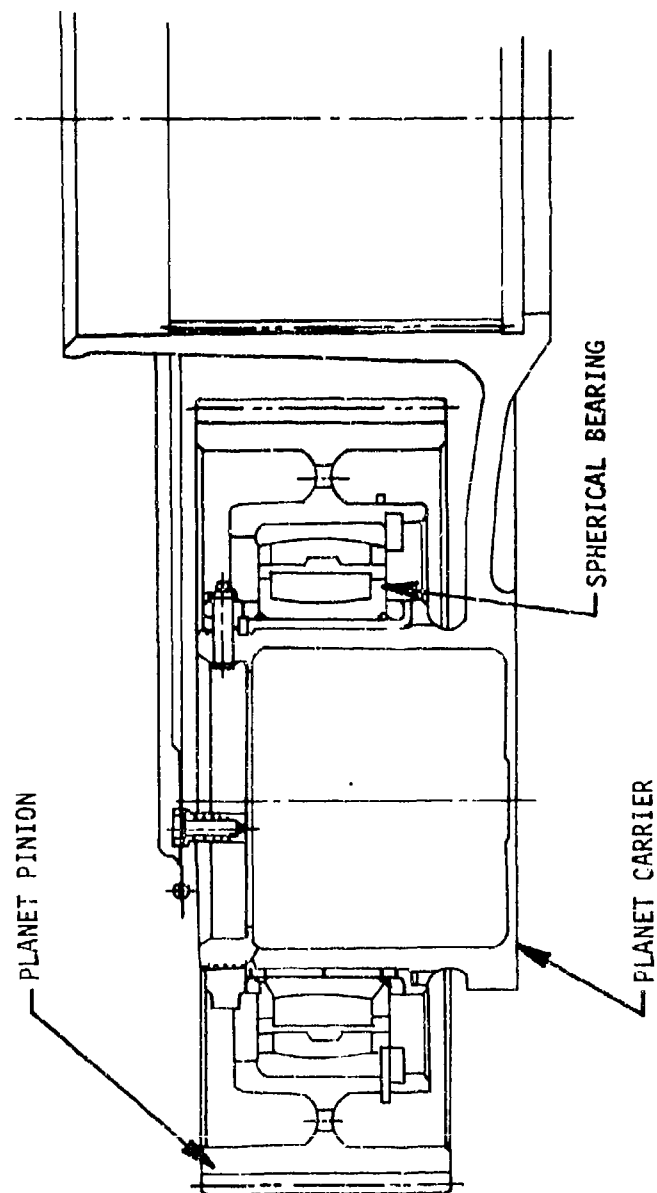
SPHERICAL BEARING PLANETARY PINION SUPPORT
